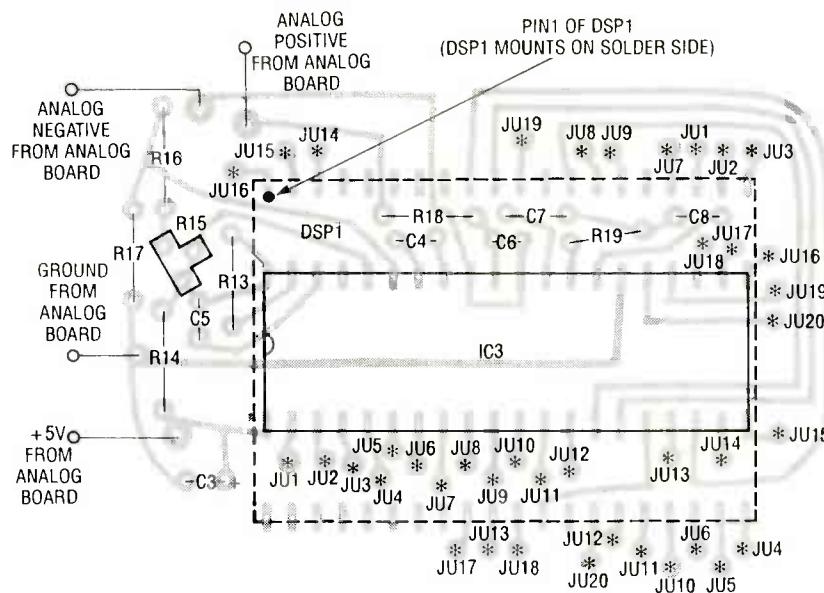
PARTS-PLACEMENT DIAGRAM for the digital board. Note that the LCD module mounts on the solder side of the board after all other components are installed and the board is tested (see text for details). Also note the twenty pairs of pads labelled JU1~JU20. You must solder a jumper wire between each pair of pads; for example, JU1 to JU1, JU2 to JU2, and so on.
